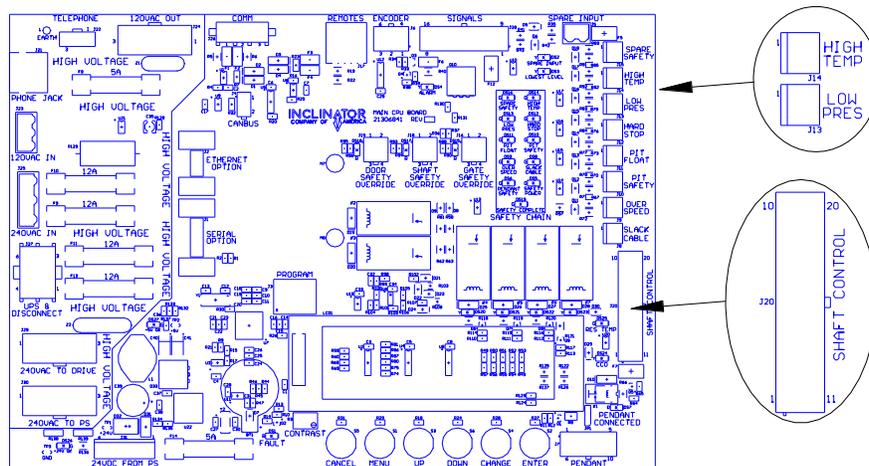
CPU Board, Pump Control Enclosure Signal Cable Connections
